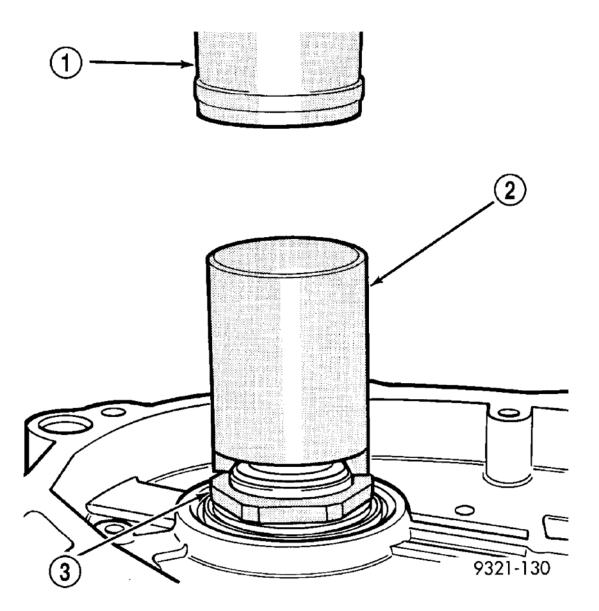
Identifying Arbor Press, Staking Tool - 6639 & New Nut Courtesy of CHRYSLER LLC
